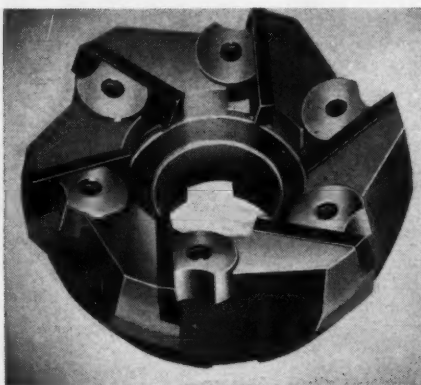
Beaver Solid Carbide Blade Milling Cutter
